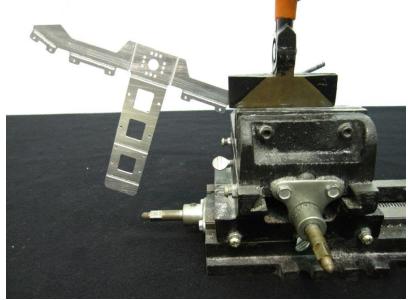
Use a compound-leverage seamer to grip the part for bending.
